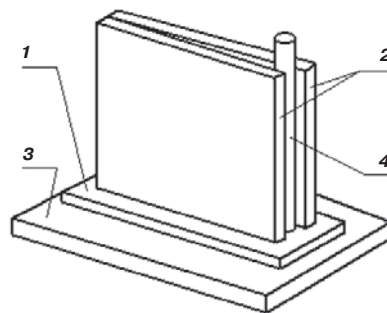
Assembly scheme for studying filler metal's flowing into a vertical wedge-shaped gap:
